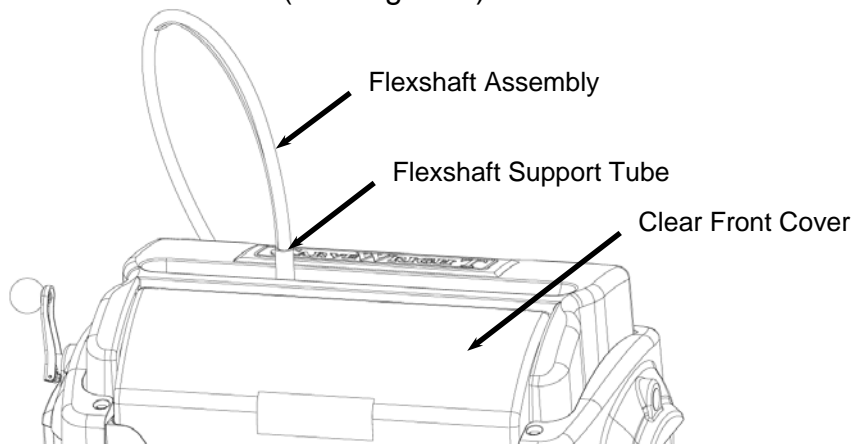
EXTERIOR VIEW OF THE FLEXSHAFT AND HEAD COVERS
